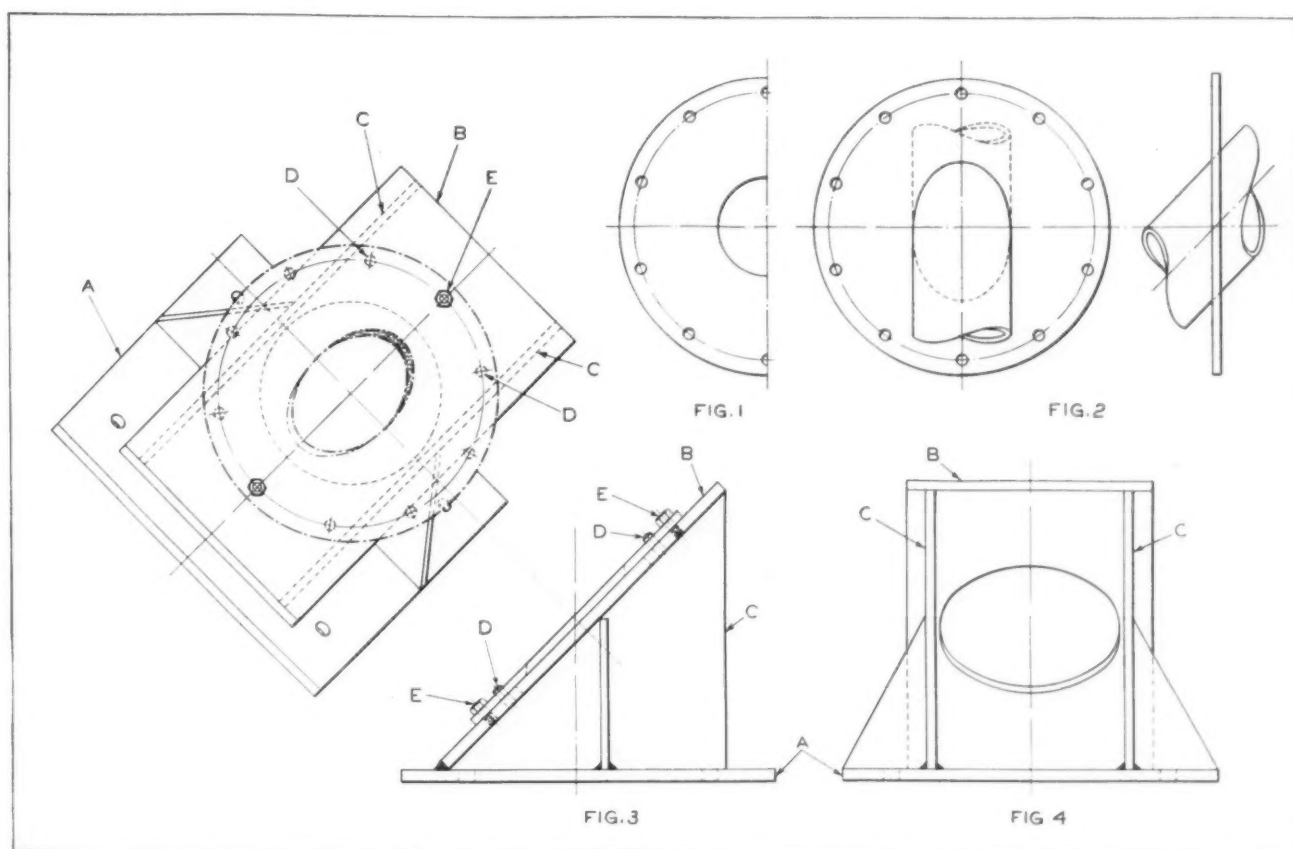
One-half View of Flange as Prepared for Boring Angular Hole for Pipe. Fig. 2. Flange with Pipe Inserted at Angle. Figs. 3 and 4. Fixture Used on Boring Mill for Boring Angular Hole through Flange to Permit Inserting Pipe as Shown in Fig. 2
